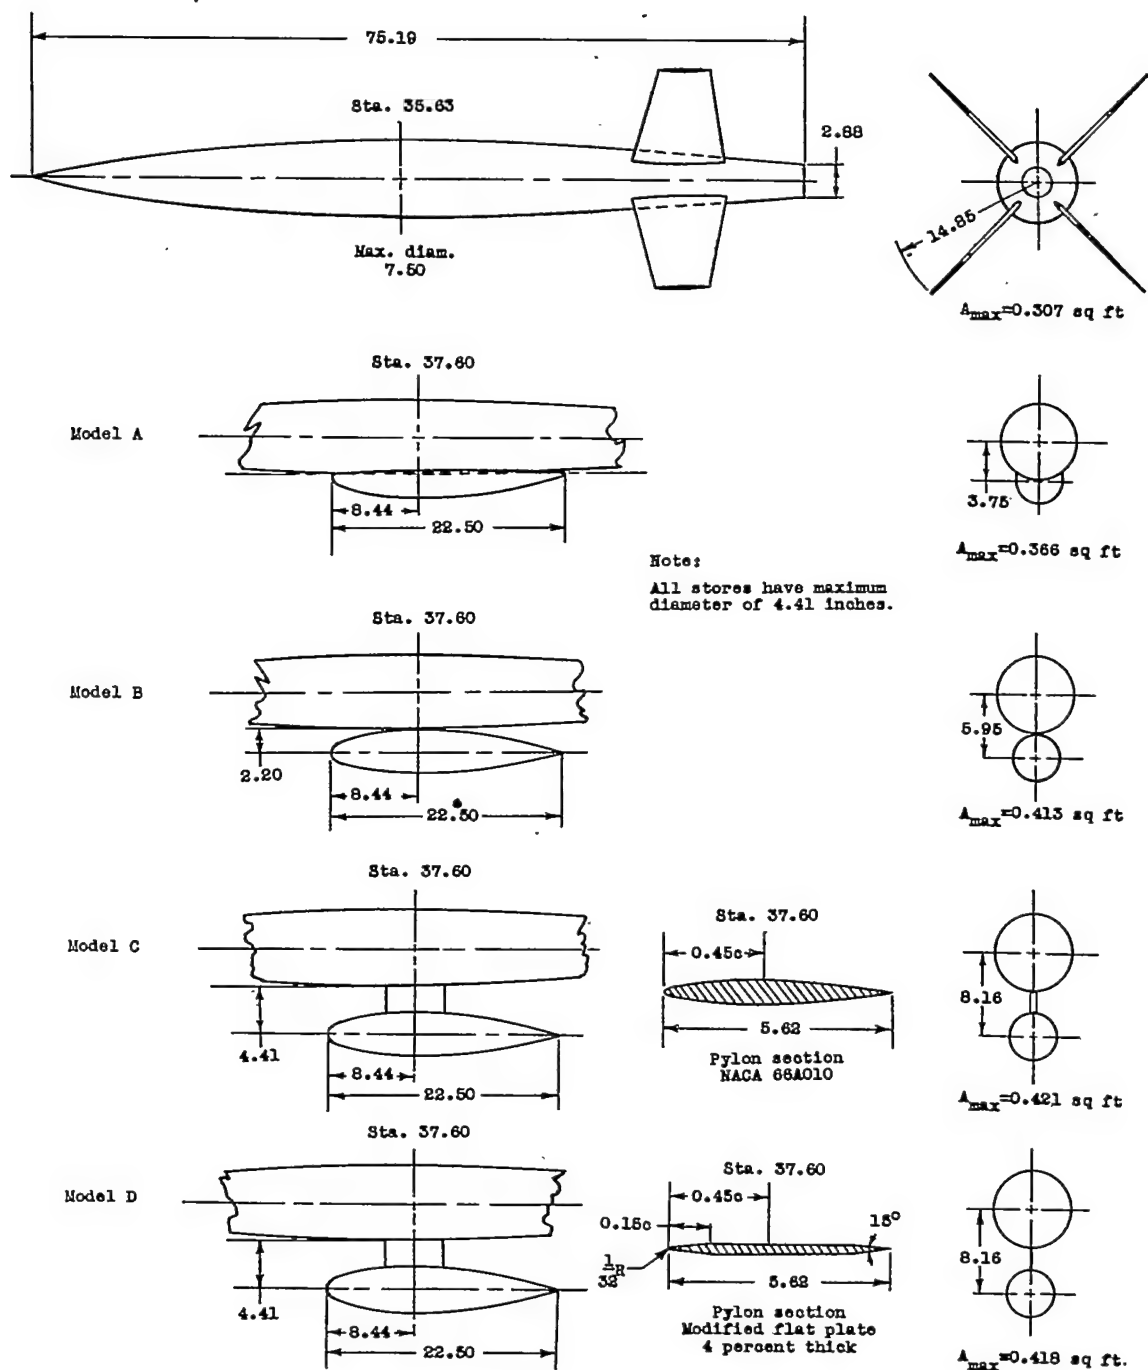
Principal dimensions of fuselage-mounted store configurations.
